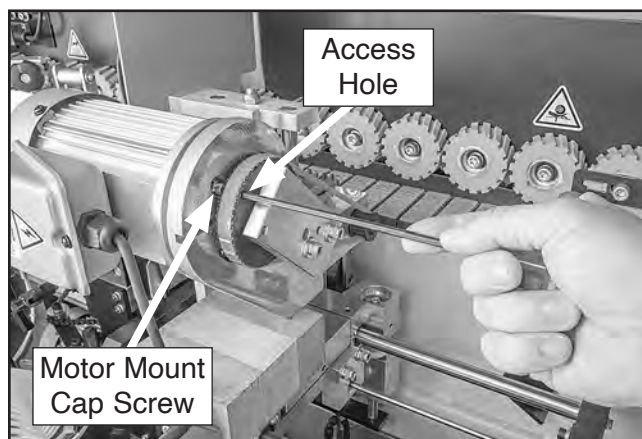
Loosening one of four end trimmer motor mount cap screws.
